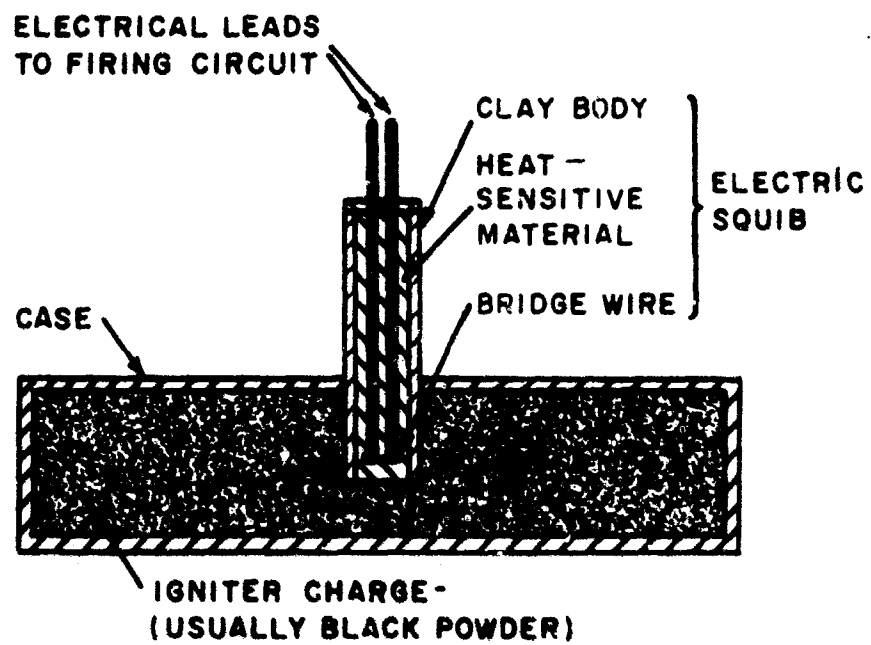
A TYPE OF IGNITER ASSEMBLY
